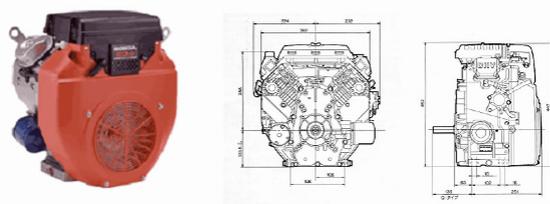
GX620 multipurpose engine manufactured by HONDA (Japan). Dimension: 386x456x452 mm. Weight: 42.5 kg. Price: US\$ 1,170.
